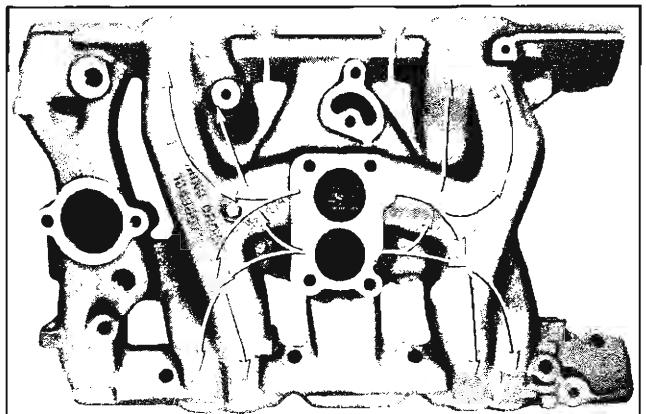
Intake Manifold—4 Barrel Carburetor
